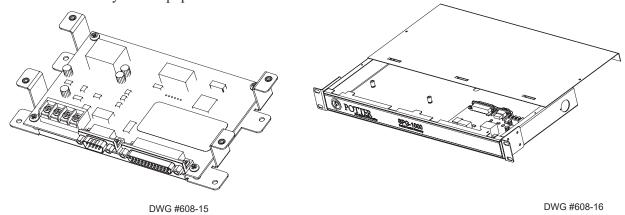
SPG-1000 Serial Parallel Gateway Board & Rack Mount
